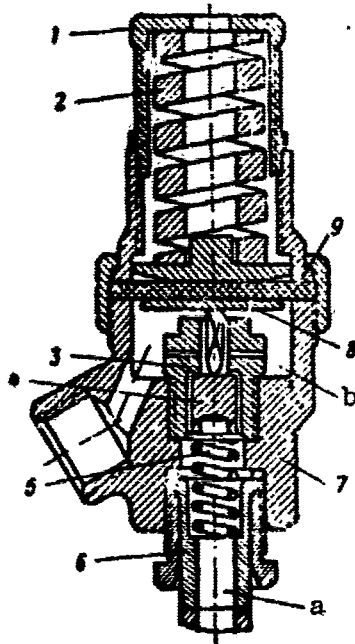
Pressure reducer. a) high-pressure chamber; b) low-pressure chamber. 1) cap; 2) main spring; 3) valve seat; 4) valve; 5) spring; 6) intake; 7) reducer housing; 8) head; 9) diaphragm.
